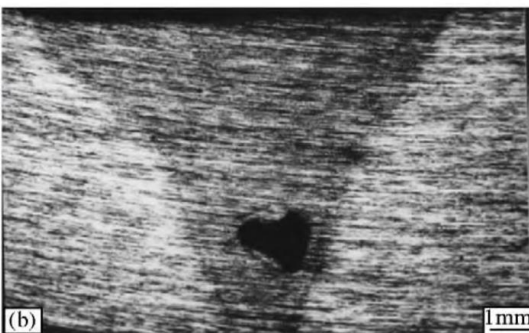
(b) :Cross-section of weld(800mm/min)
